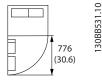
Front Clearance of IP21/IP54 Enclosure Type, Frame Size F8
